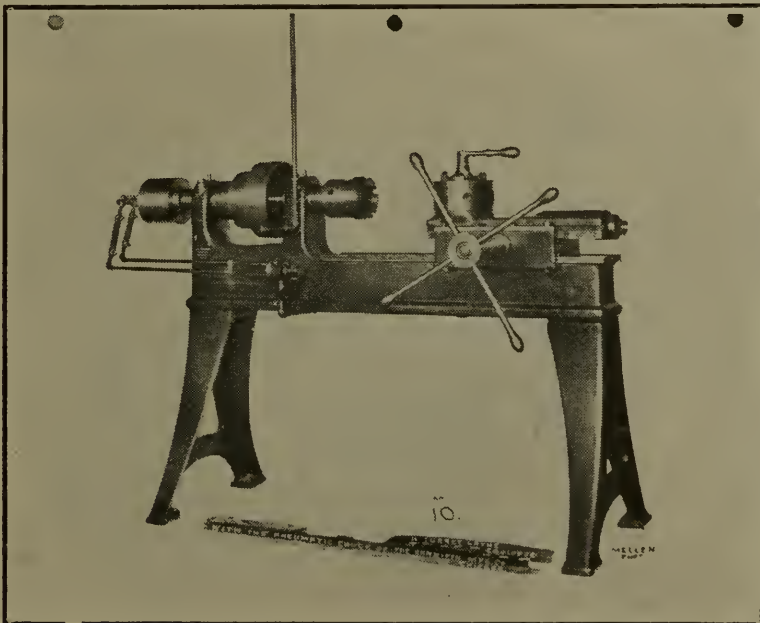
A master hinge Collet chuck, air operated, applied to a small turret lathe.
